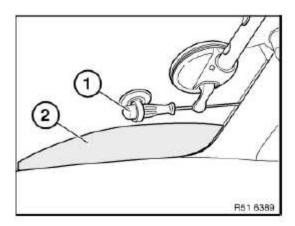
Inserting Cutting Wire In Bend Between Window And Body Cutout
